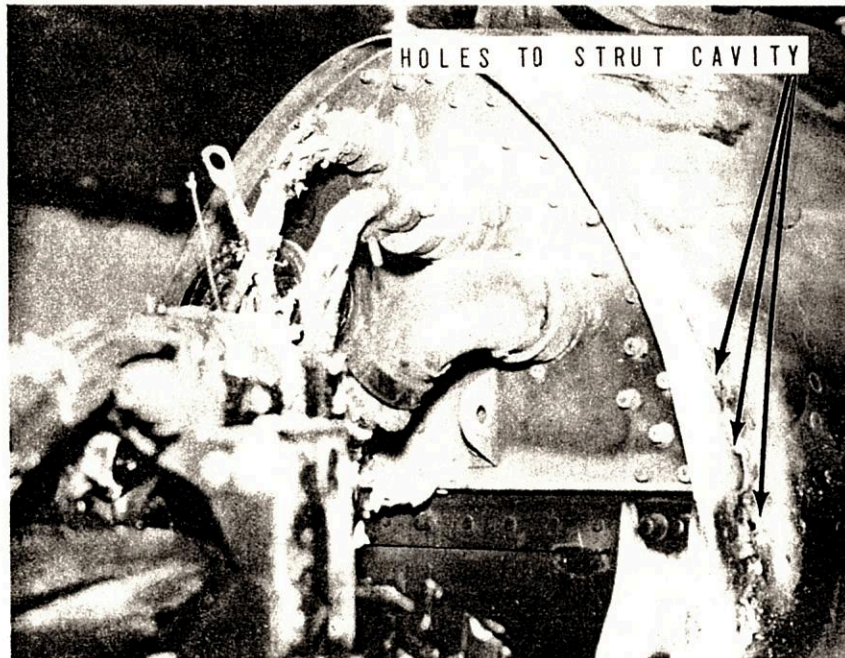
DAMAGED STRUT DOWNSTREAM OF FORWARD STRUT FAIRING
